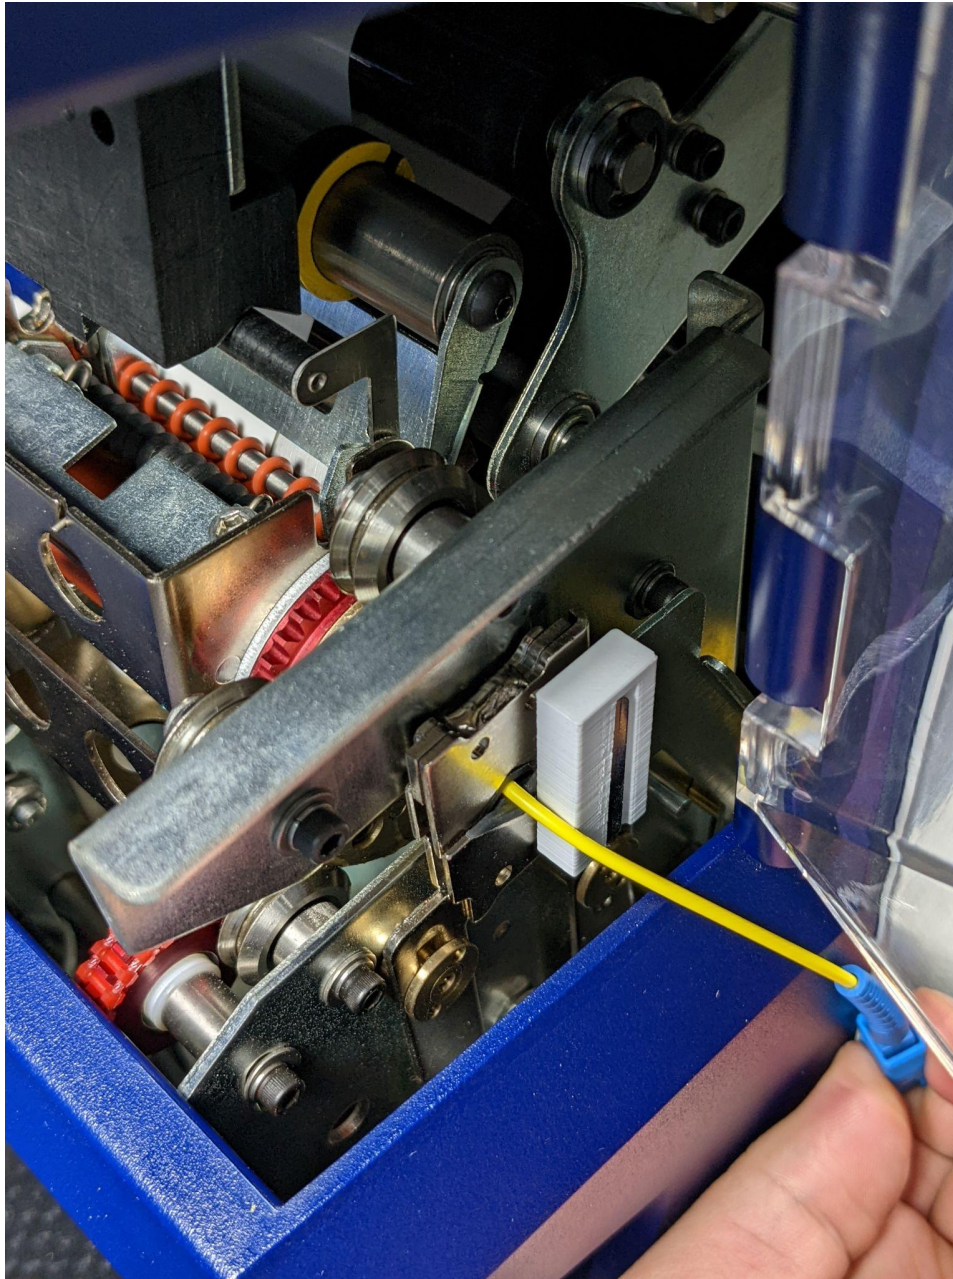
A single cable shown being gripped by the A6500 printer jaws with 3D printed trigger extender
